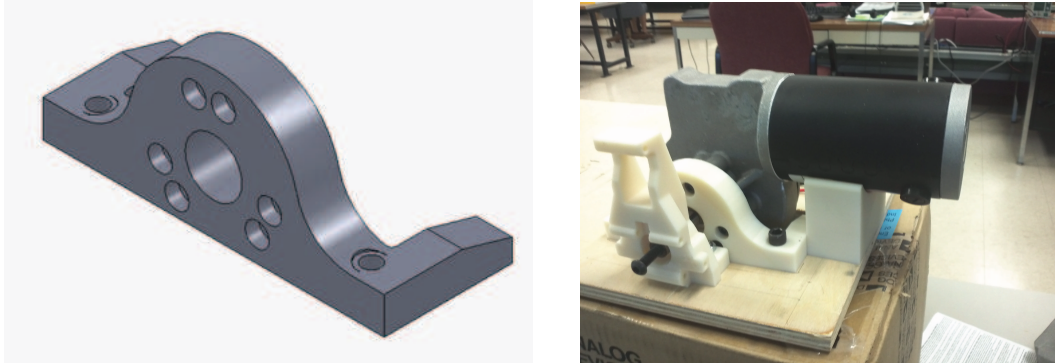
Motor bracket (left), motor-bracket assembly (right).
